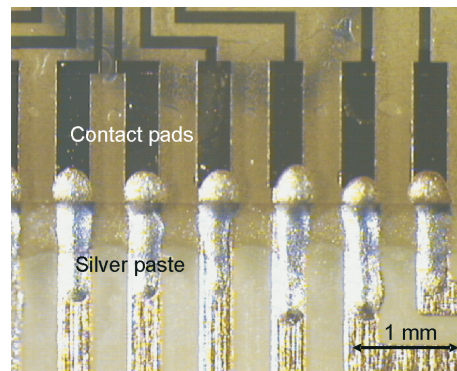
The contact pads on the SU-8 chip were connected to the PCB using silver paste. The silver paste was manually applied.
